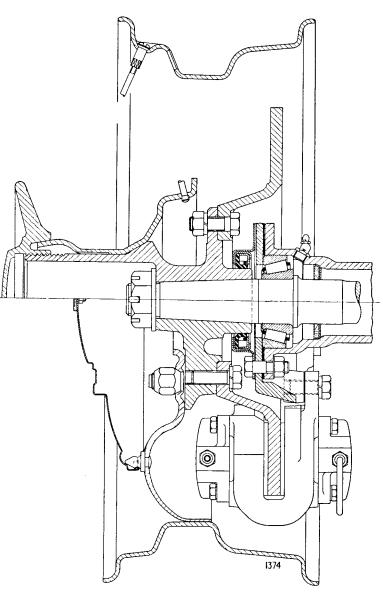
Sectioned plan view of the disc brake hub arrangement. The upper half of the illustration shows a wire spoke wheel hub; the lower half shows a disc wheel hub.
